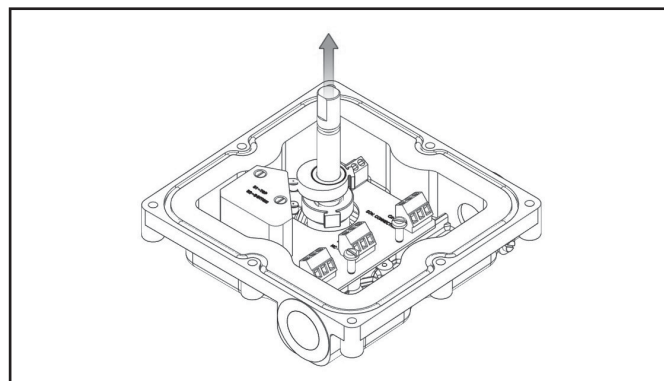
Removing the operating rod of devices with V1 and W1 switches
